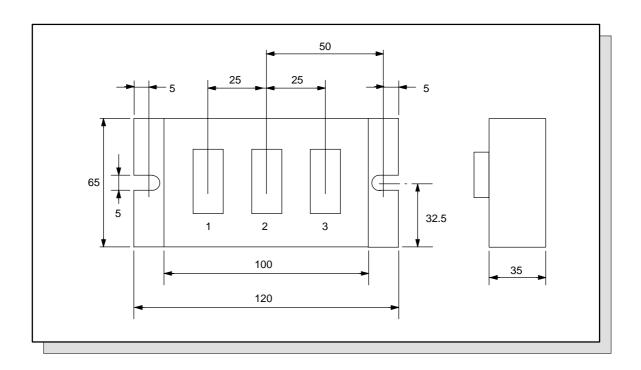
EXTERNAL DIMENSIONS OF TERMINAL RESISTANCE UNIT (FOR DNC1)
